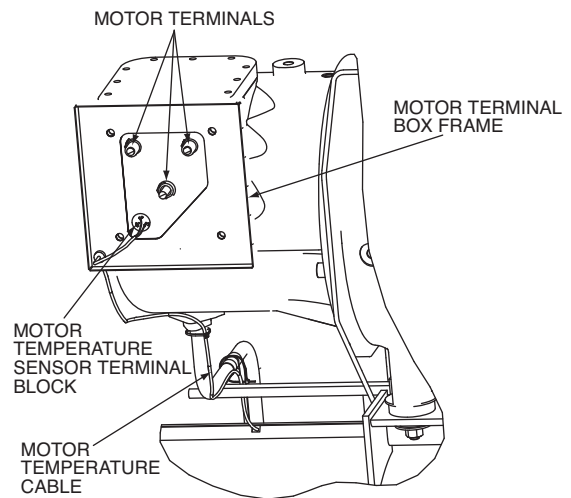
Motor Terminals (Units with Q,R Compressors Shown)
